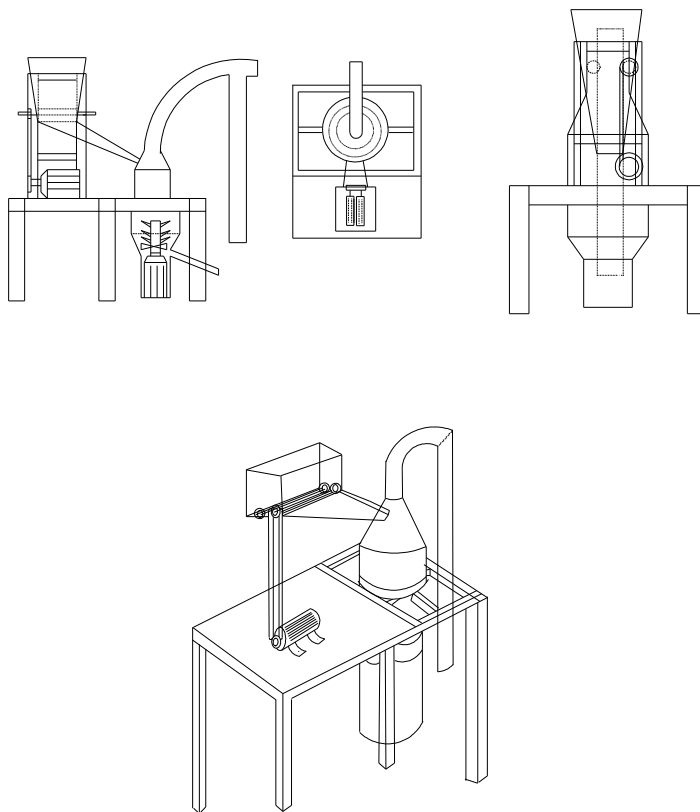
Assembly Drawing of the Breadfruit Shelling Machine
